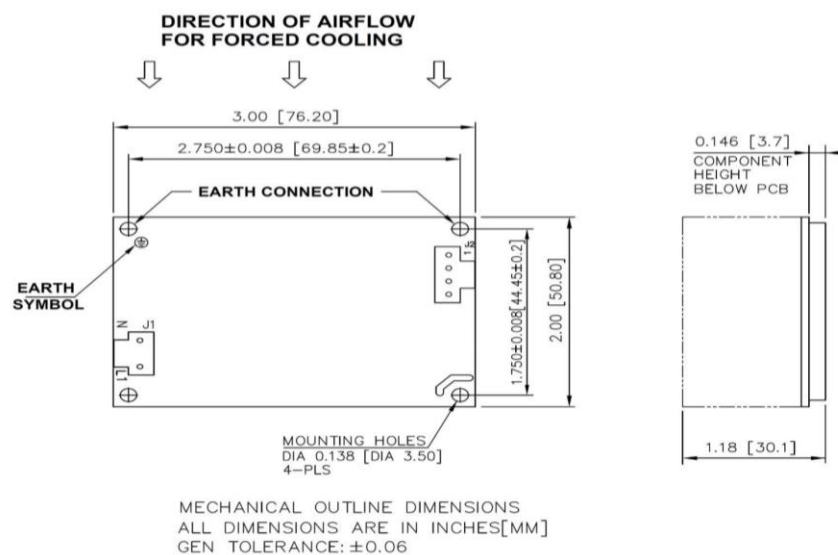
Mechanical Drawing - Molex Header (Option 2)
